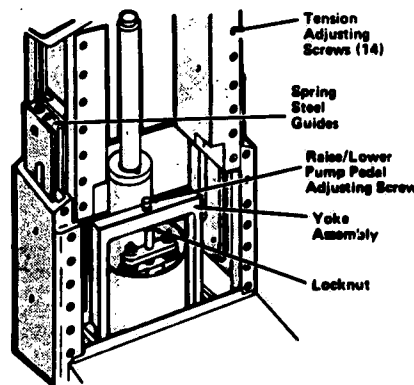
SUPERSTRUCTURE AND PUMP ASSEMBLY.
